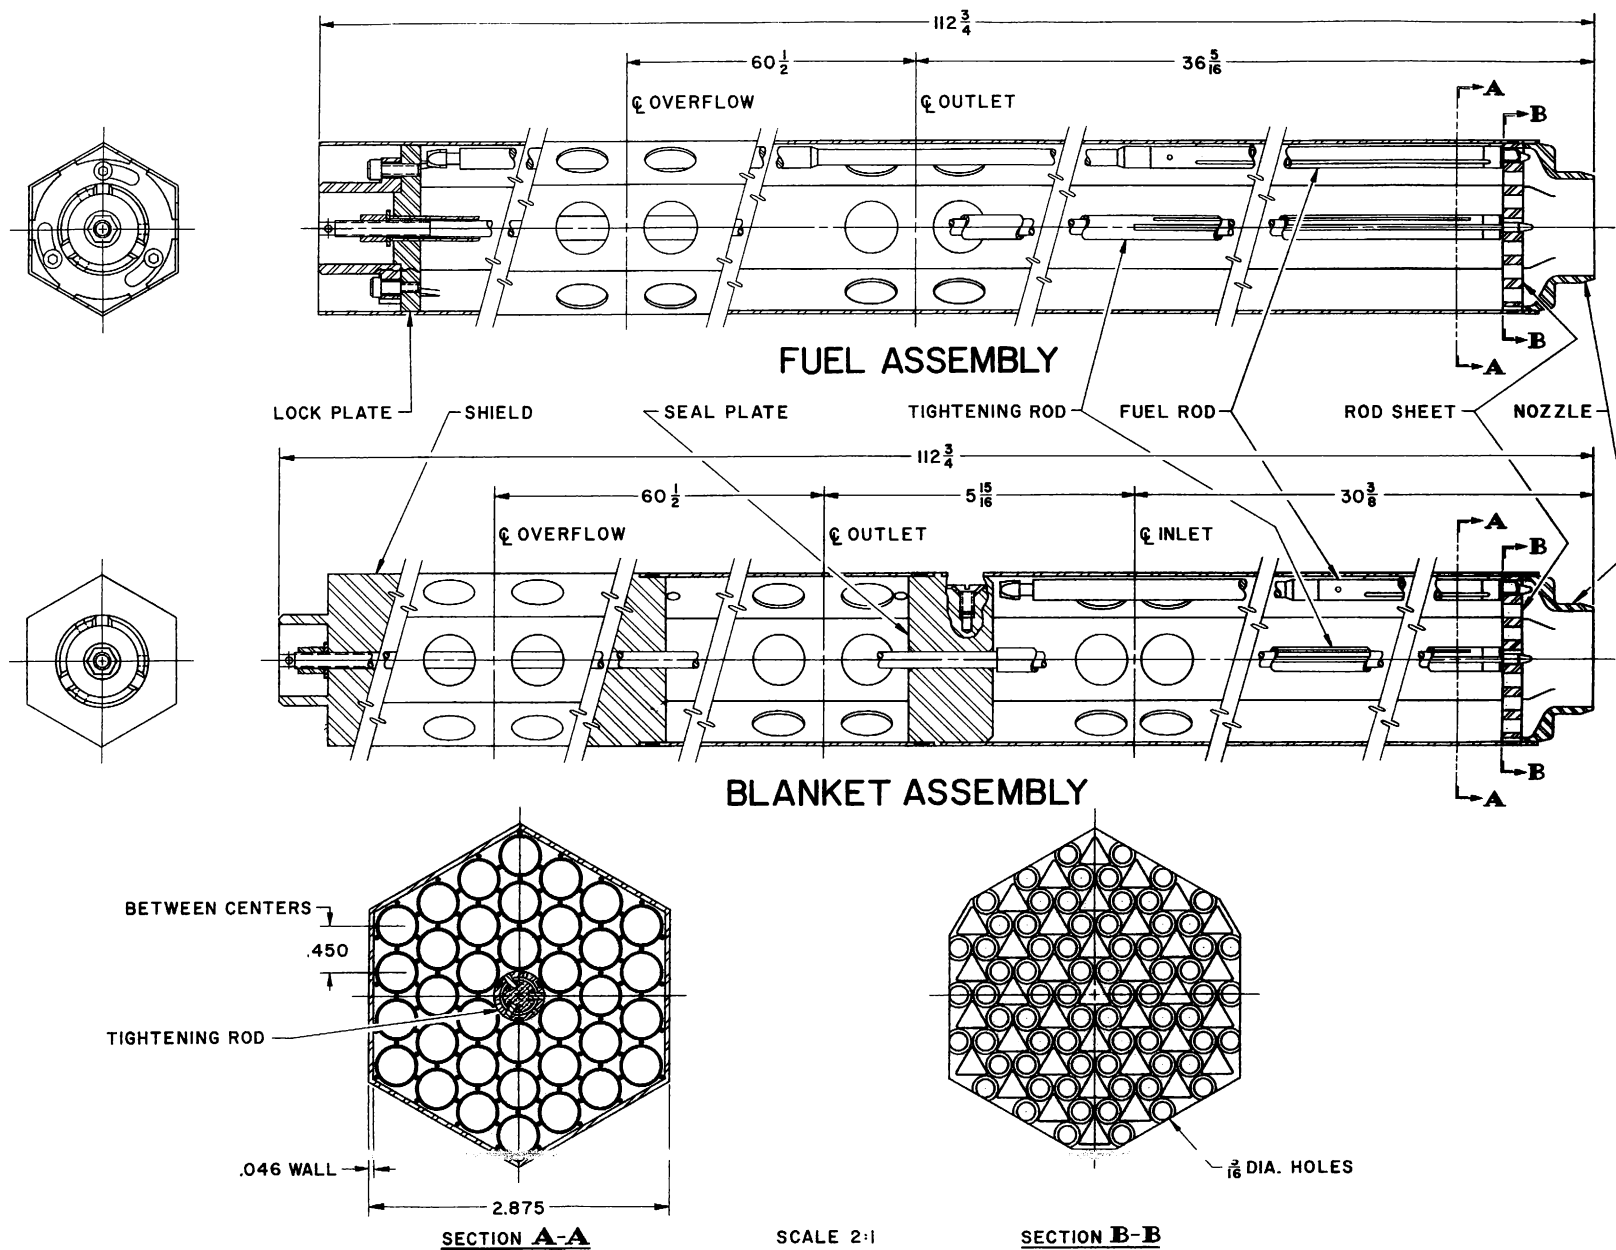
EBR-I, Mark III Fuel and Blanket Assembly
